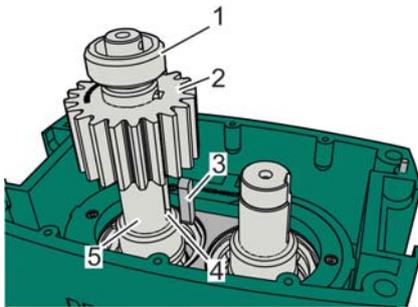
Sliding the toothed wheel onto the drive shaft, example
